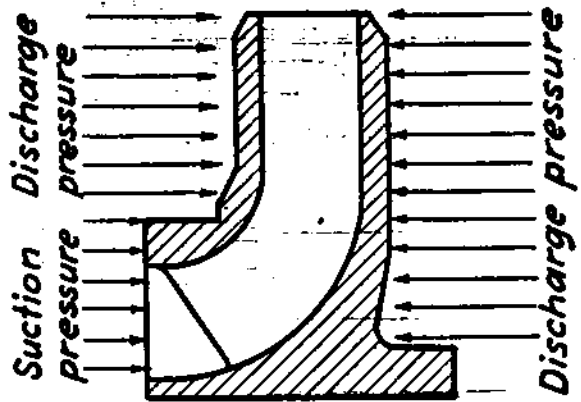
Axial hydraulic forces on the two sides of a single-suction impeller without back wearing ring and balance holes are unequal, resulting in an axial thrust.
